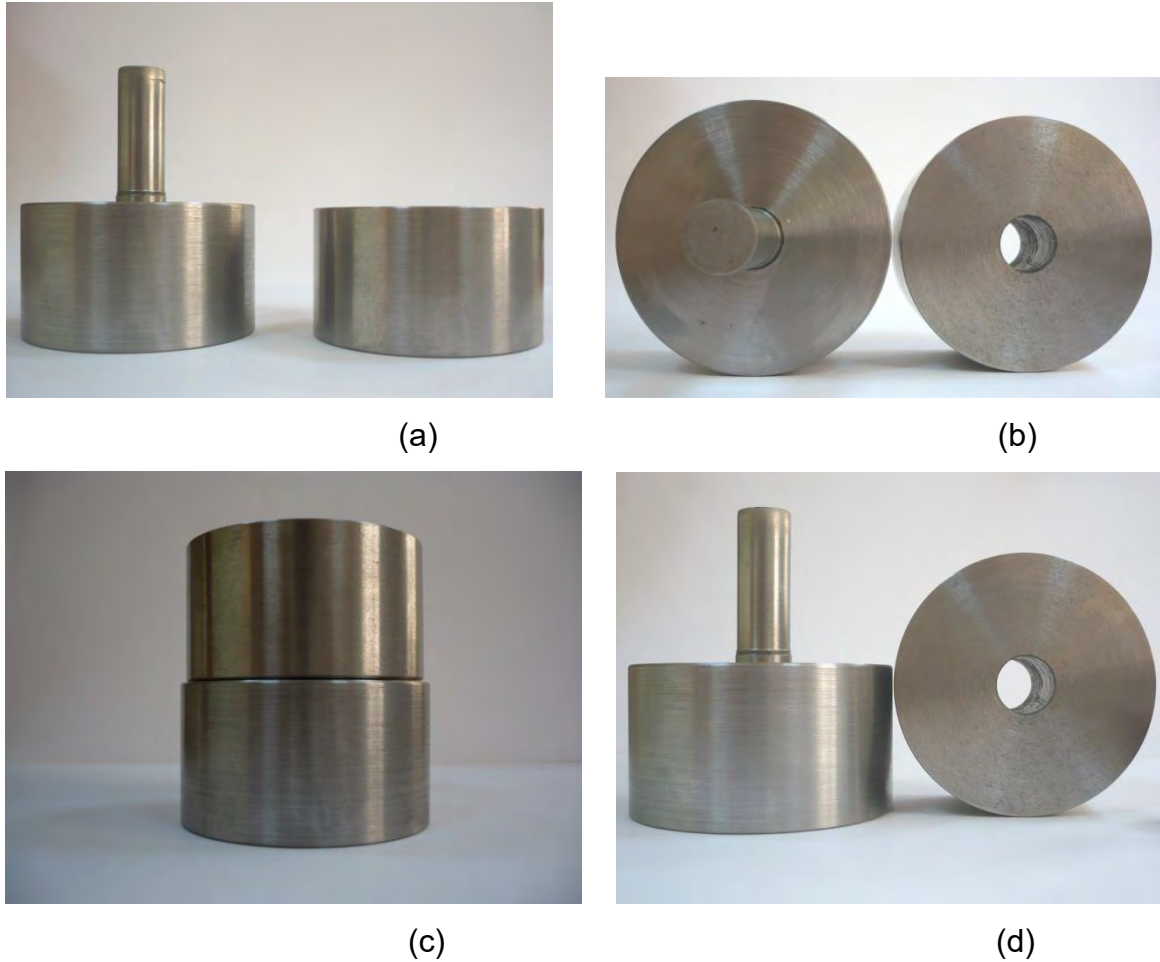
(a), (b), (c), (d) Pressing mold
